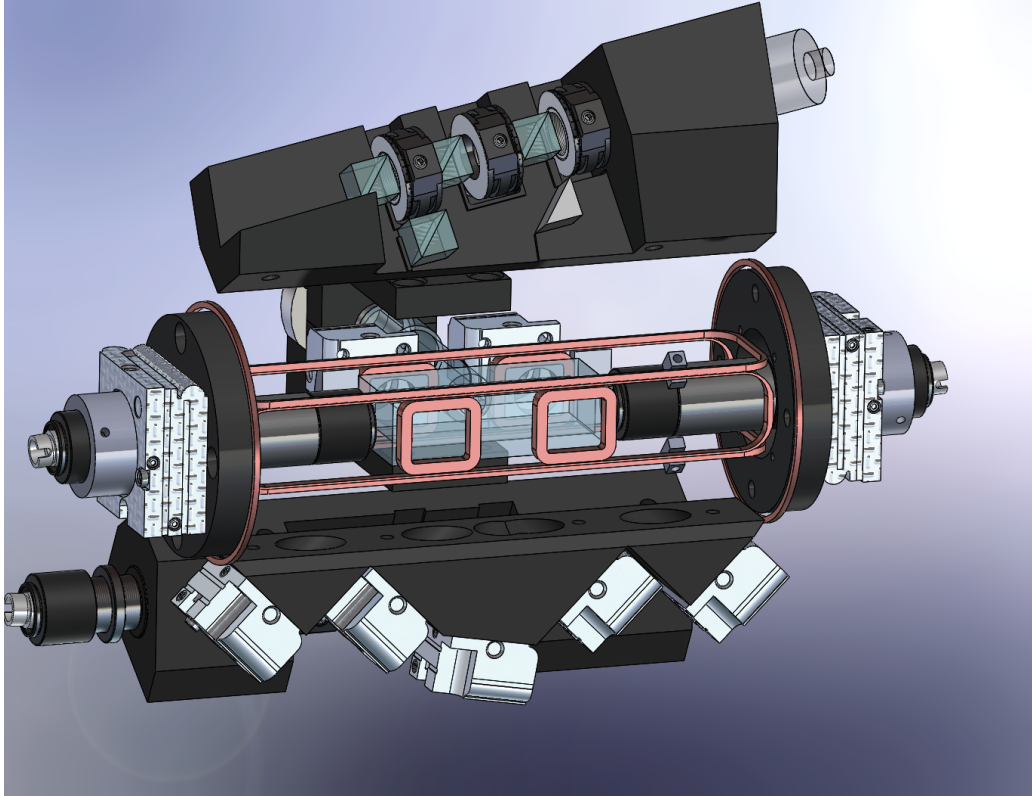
CAD model of the sensor head. Half the cooling assembly, one probe module, and the mounting frame are not shown for clarity. The optomechanical frame is machined from G10.
